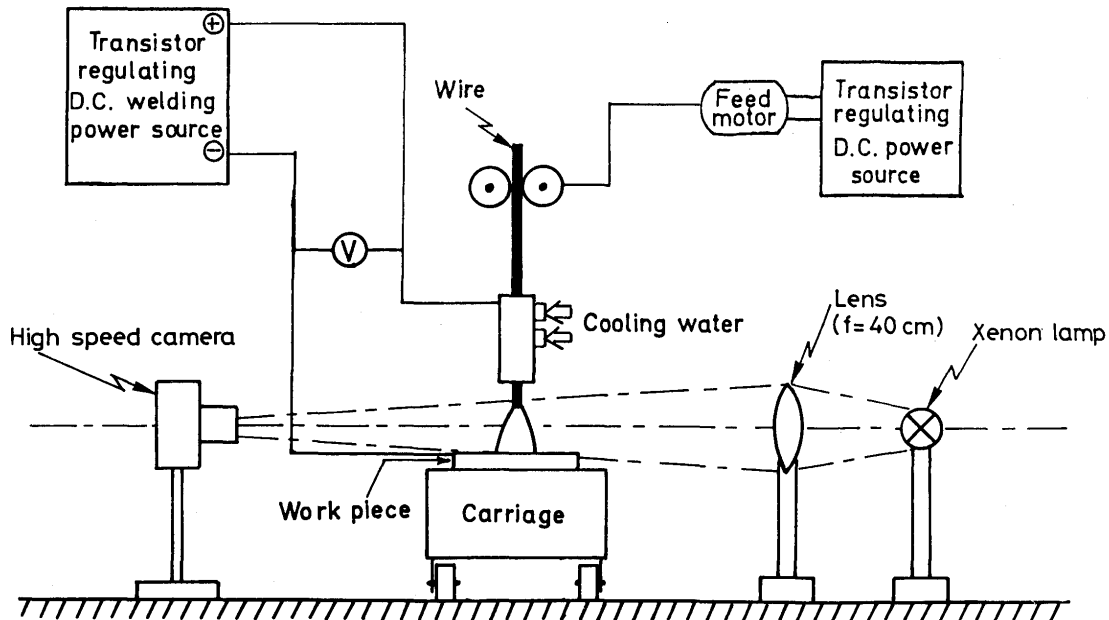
Schematic illustration of experimental setup of GMA welding.
